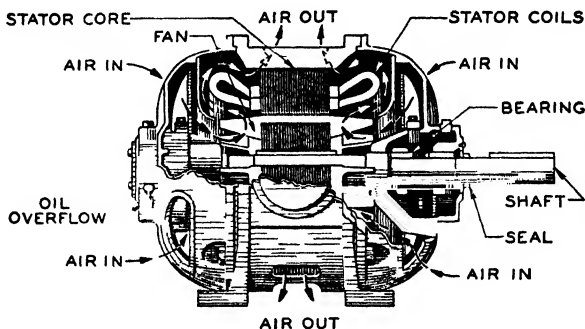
Partial Cross Section of a Fan Cooled Squirrel Cage Motor
